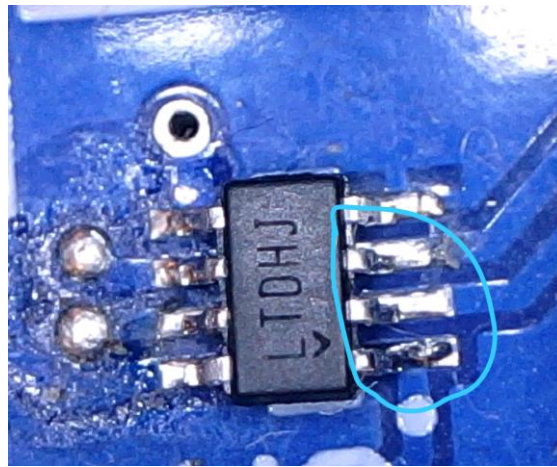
Cold solder joint on SOT-23-8 footprint.
